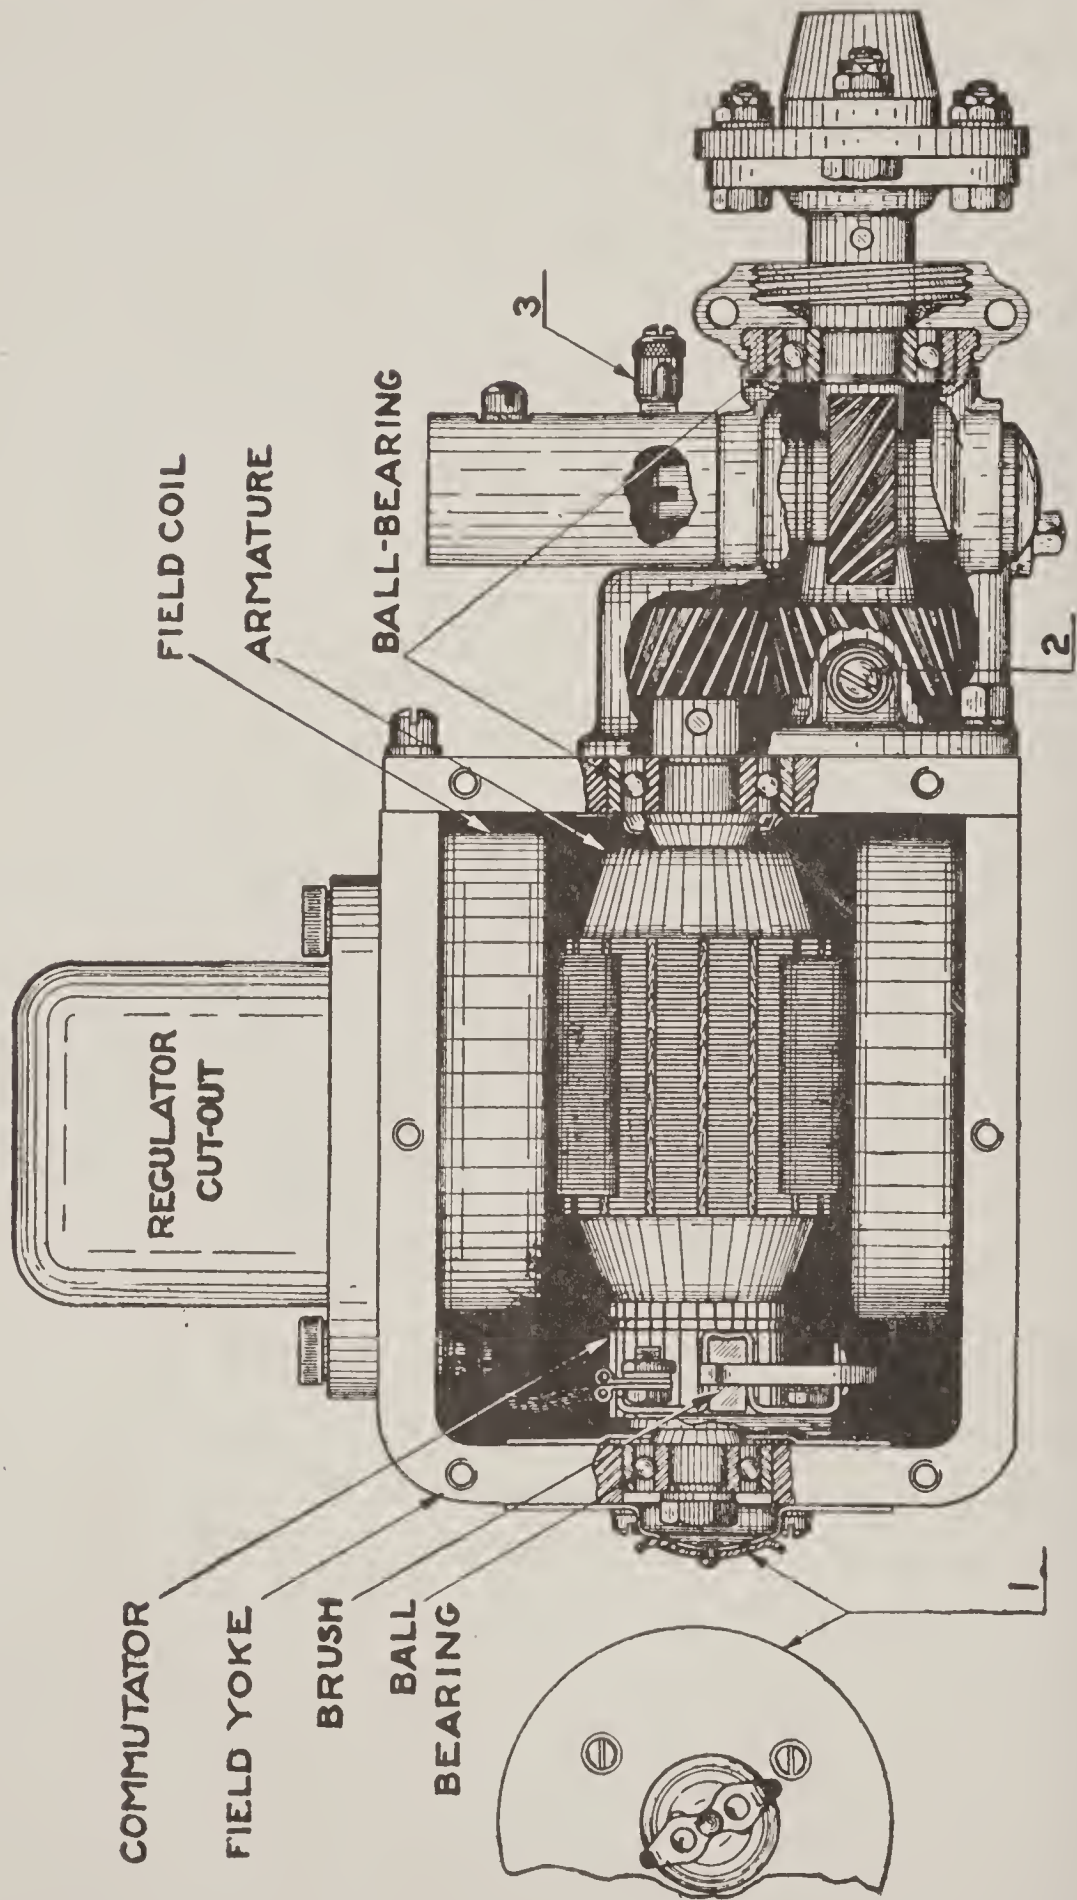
Section of Gray & Davis Generator with Ignition Distributor Gearing (Shaft Drive)
